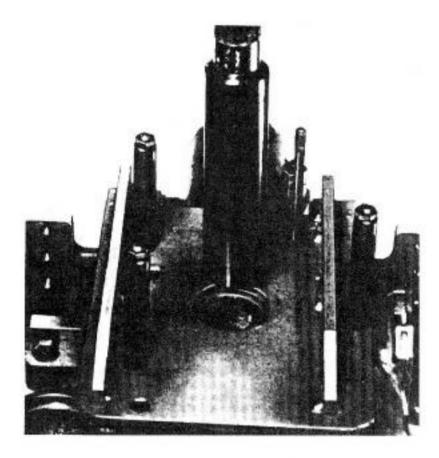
Driving in new pinion seal. This is a very critical seal, so makeshift installation methods should not be used.
